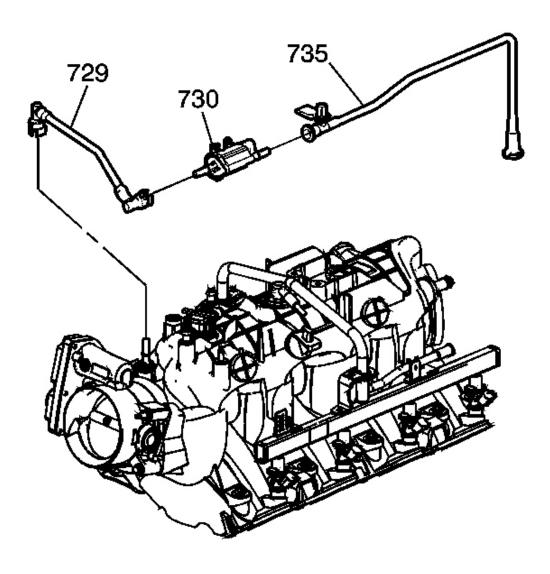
EVAP Purge Valve & Tubes Courtesy of GENERAL MOTORS CORP.
